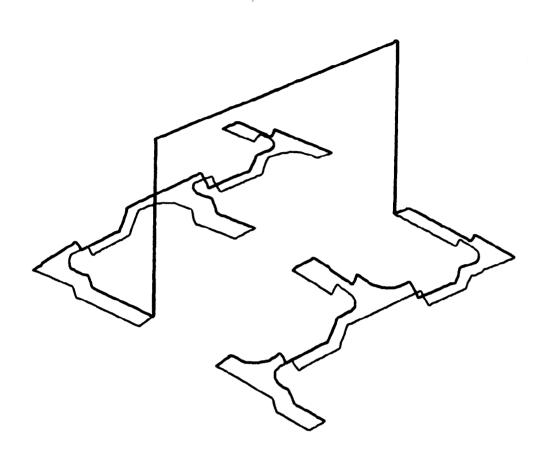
CUTTER PATH FOR BEARINGS OF A TWO-OPENING DIE
